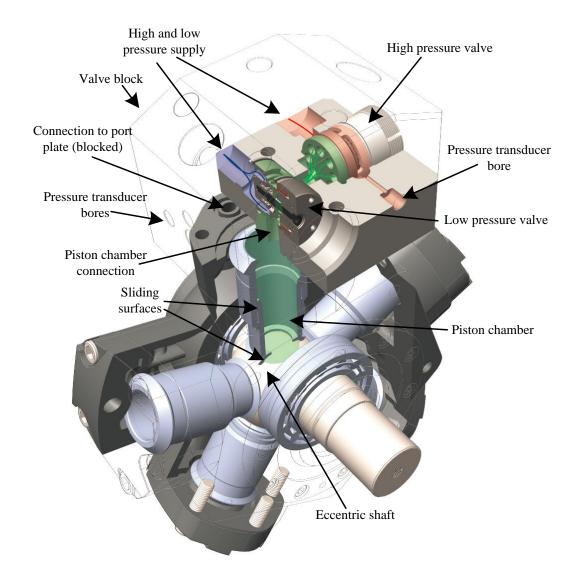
CAD model showing the modified machine and the custom valve block equipped with the MCA and MMA PT valves.
